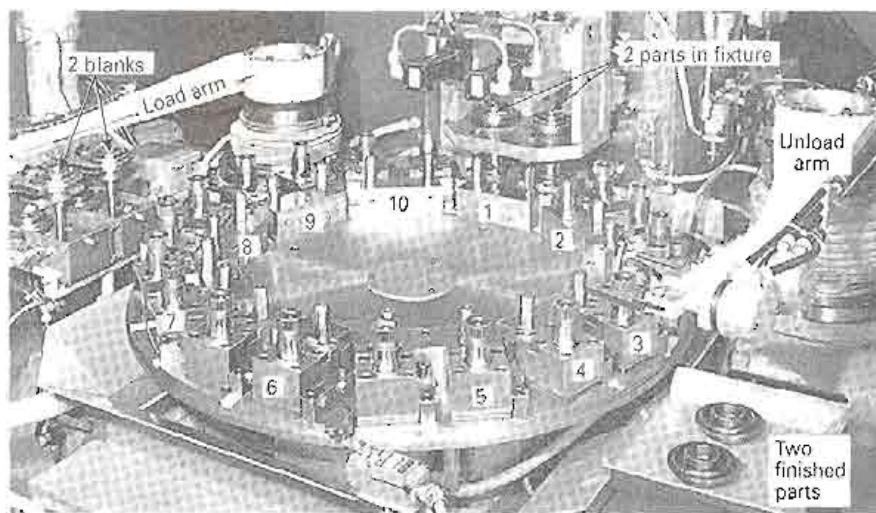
Blind gear spline broaching machine for producing internal gears. The machine has automated pick-and-place arms for load/unload. (Courtesy of Apex Broach and Machine Company.)
